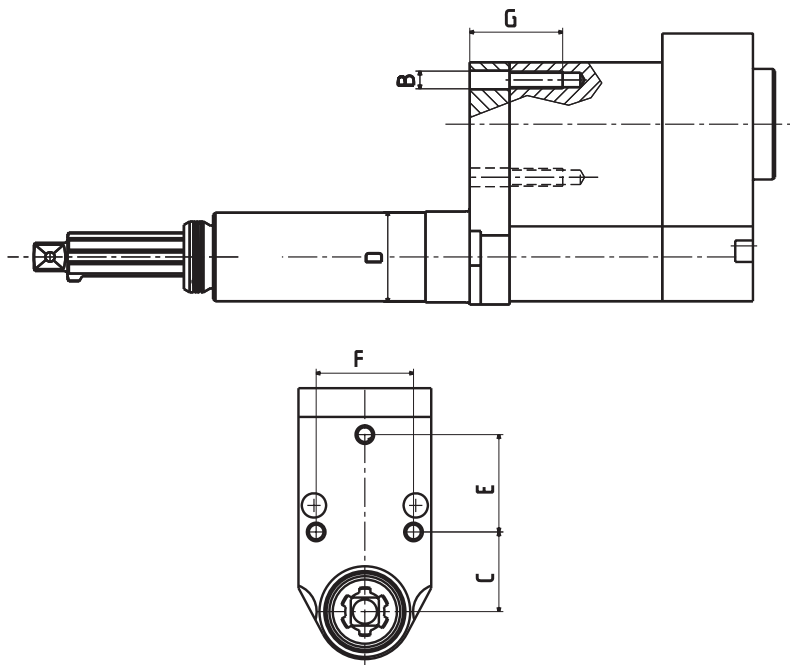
Main dimensions for the installation on a mounting plate (offset drive)
